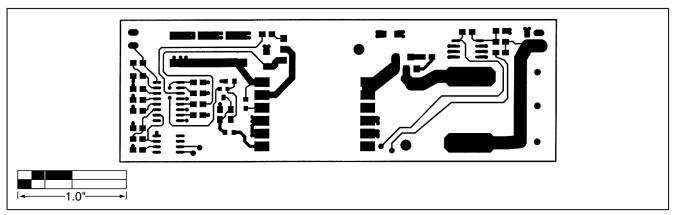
MAX5003-50W EV Kit PC Board Layout—Component Side
